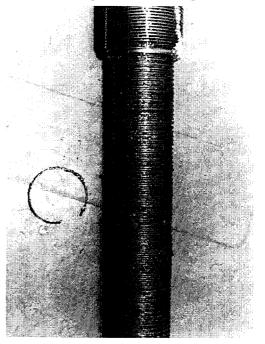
FAILED LIFTING SCREW SHOWING STRETCHING OF THREAD FORM AND MORE STRIPPED THREADS FROM LIFTING NUT
